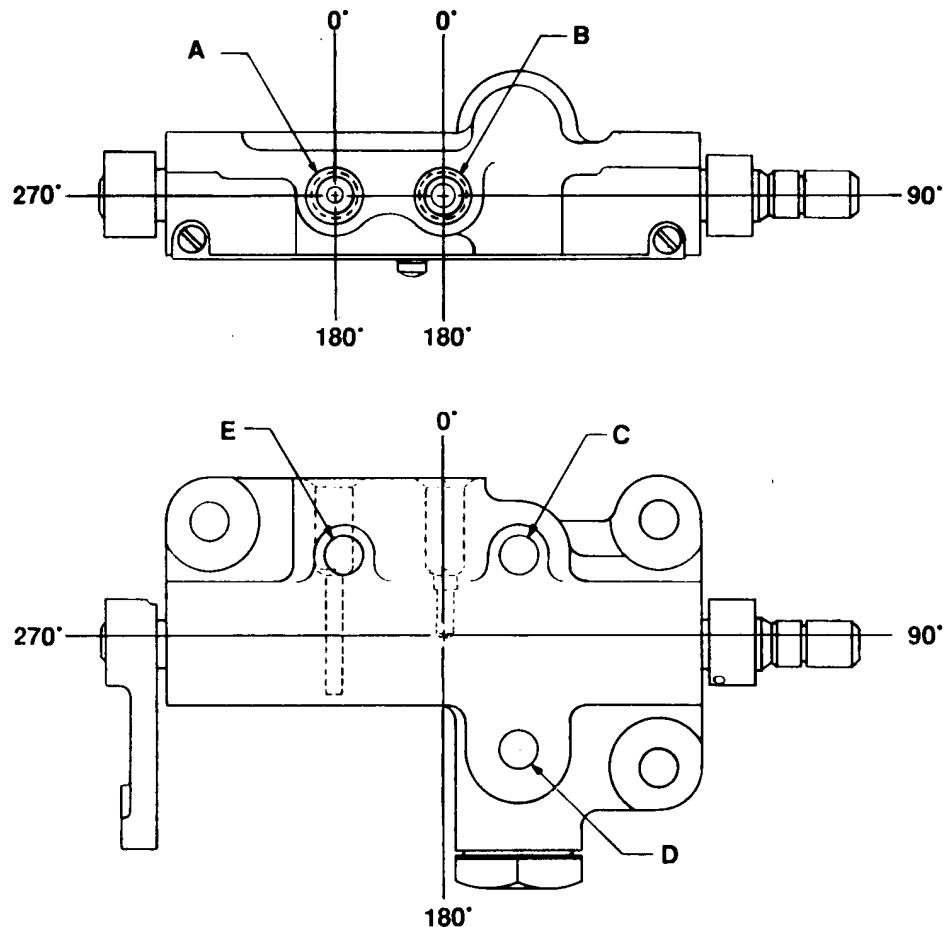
E. FUEL PUMP FITTING OREINTATION I0-550-G5B & G6B
